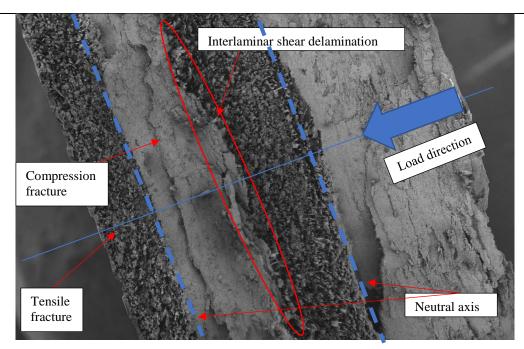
Cropped view of the fracture surface at 16X magnification. 2 different types of fracture surfaces are clearly visible
